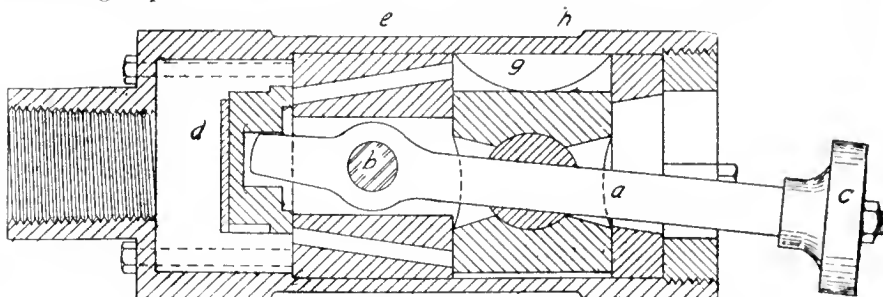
SECTIONAL VIEW OF "DEAN" BOILER TUBE CLEANER.
